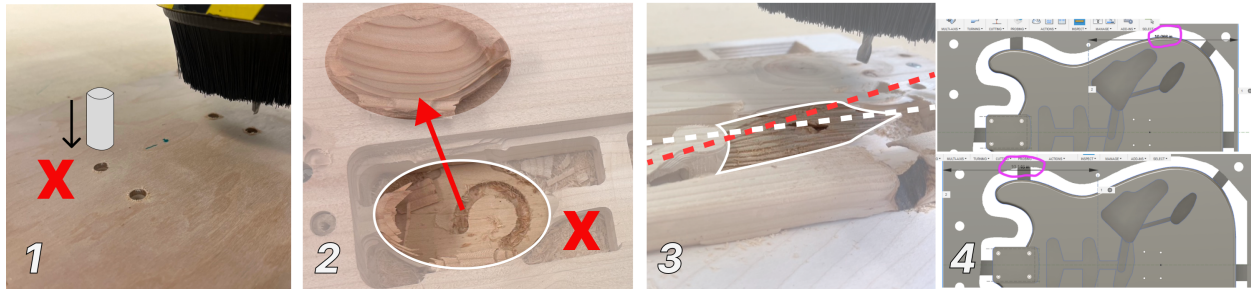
Examples of Errors that Arise in Two-Sided Milling. (1) A milled alignment hole is too narrow for the dowel to fit, requiring a second set of holes to be milled. (2) The CAD design of a spoon features a handle that is too narrow and gets torn off by the mill. (3) Flipping the workpiece over an axis that deviates too much from an assumed axis of rotation results in an invalid post-milling geometry. (4) An error taken from an online forum [Ste19] where a fabricator reported misaligned features while milling a guitar. Another forum user responded that the reason was that the alignment holes were asymmetric across the axis of rotation assumed by the original poster.
